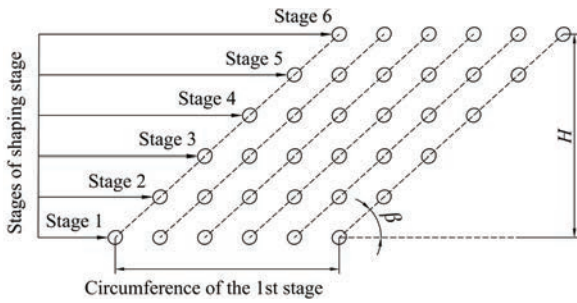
Side unfolded drawing of spirally arranged balls on the shaping stage
